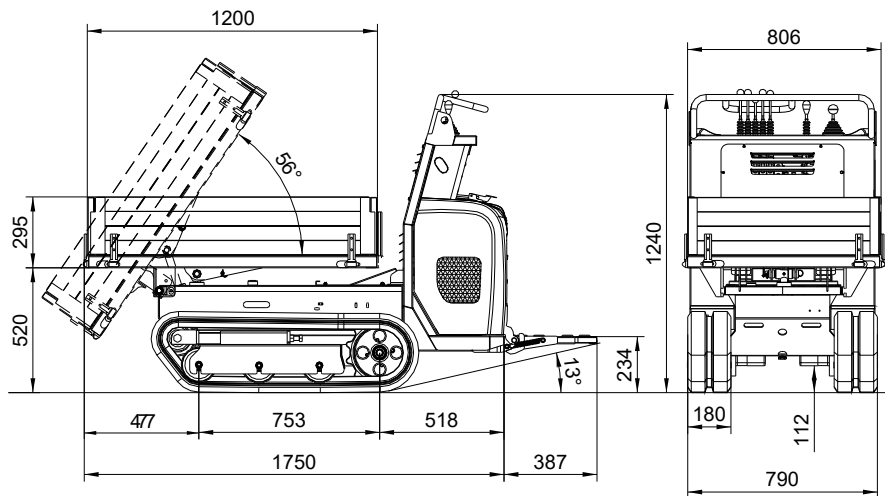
Vehicle dimensions (model DT08-D with front skip)
